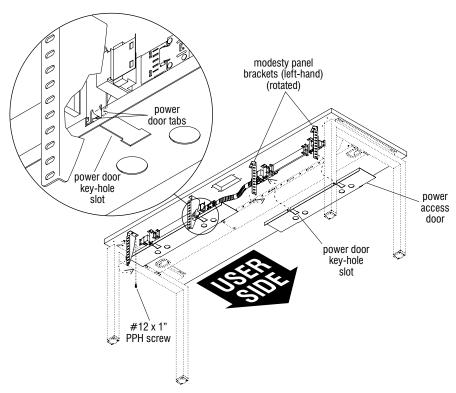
Single-Sided Fixed Benching Power Access Door Installation
